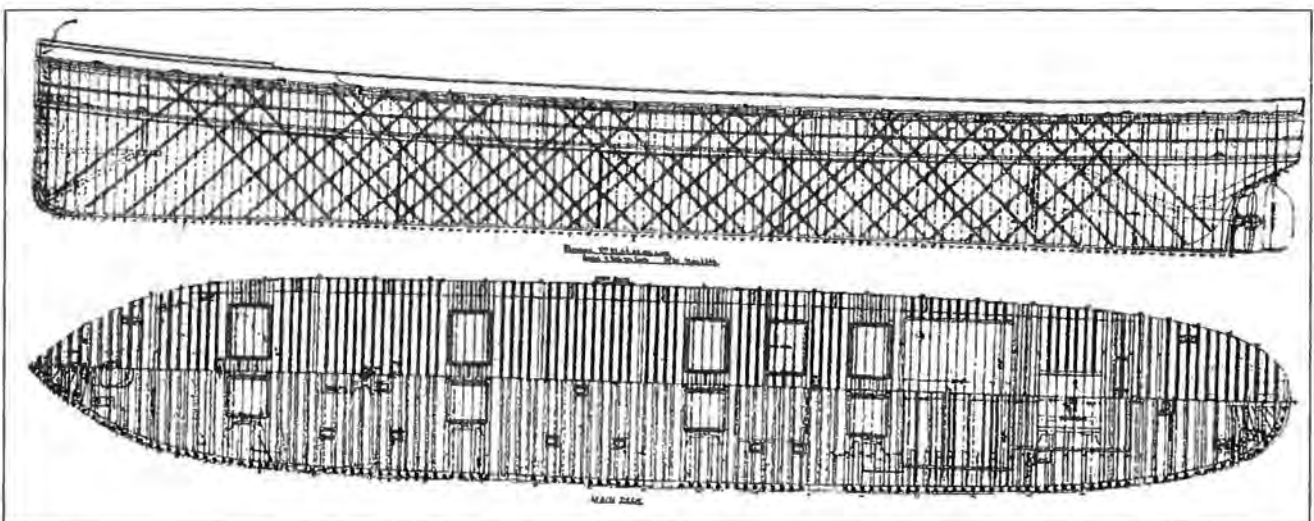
Detroit Dry Dock Company's construction plans for the F. H. PRINCE (Naval Architecture Plans: American Ship Building Company and Predecessors 1867-1920, Great Lakes Historical Society). Note hull reinforced by metal strapping.
